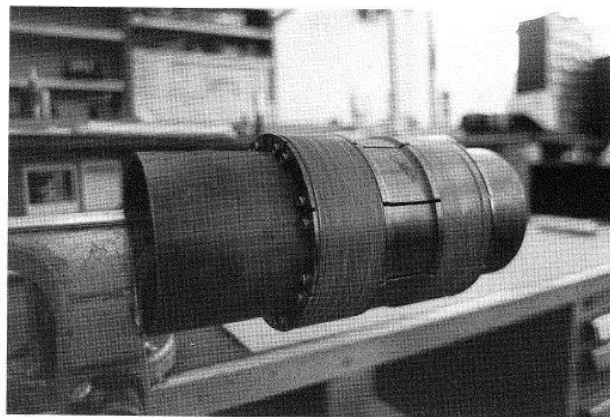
Straight reinforcement of a pipe weld using SMA wire wraps (Otuska and Wayman, 1998)
